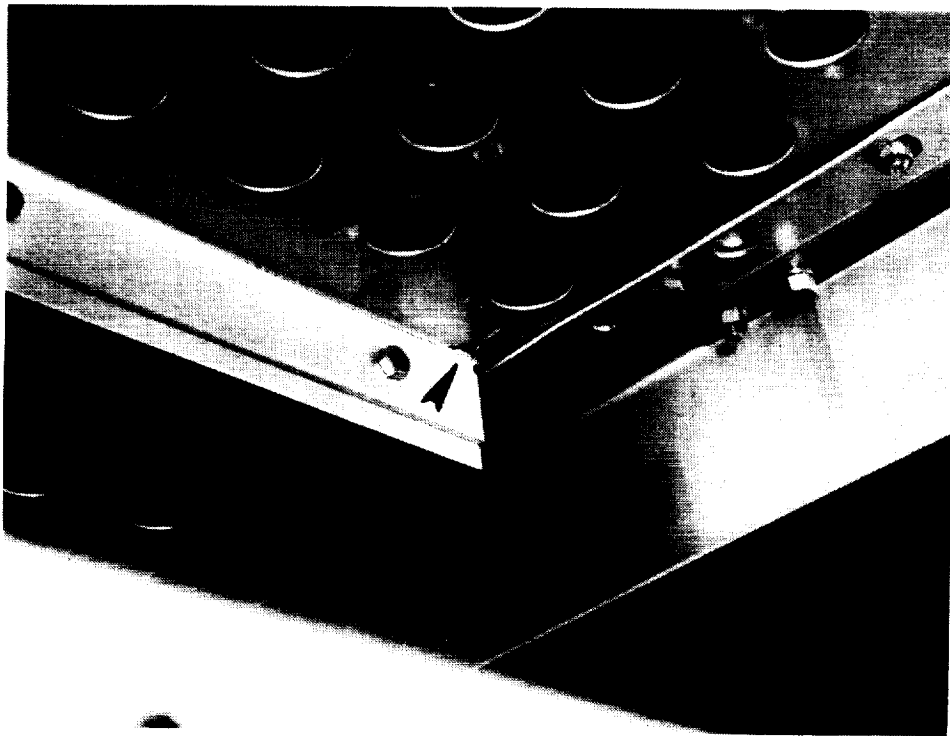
Tray Deck and Minor Beam Cracking
